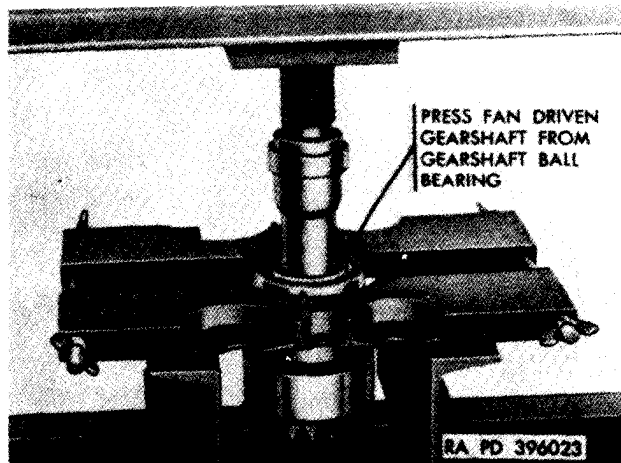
Pressing fan driven gearshaft from upper gearshaft ball bearing.
